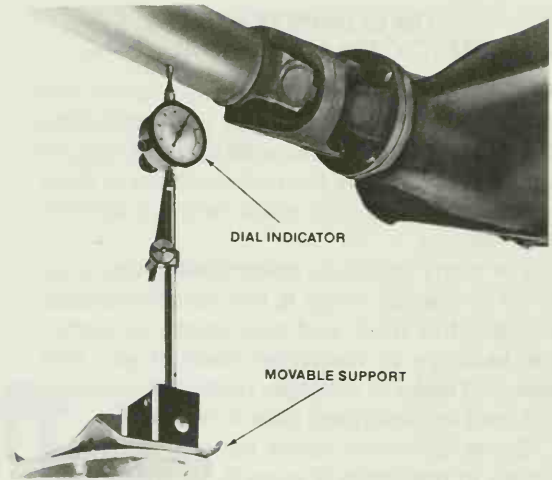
Drive shaft runout is measured with a dial indicator and a movable mount under the drive shaft. (Cadillac Motor Car Division of General Motors Corporation)
